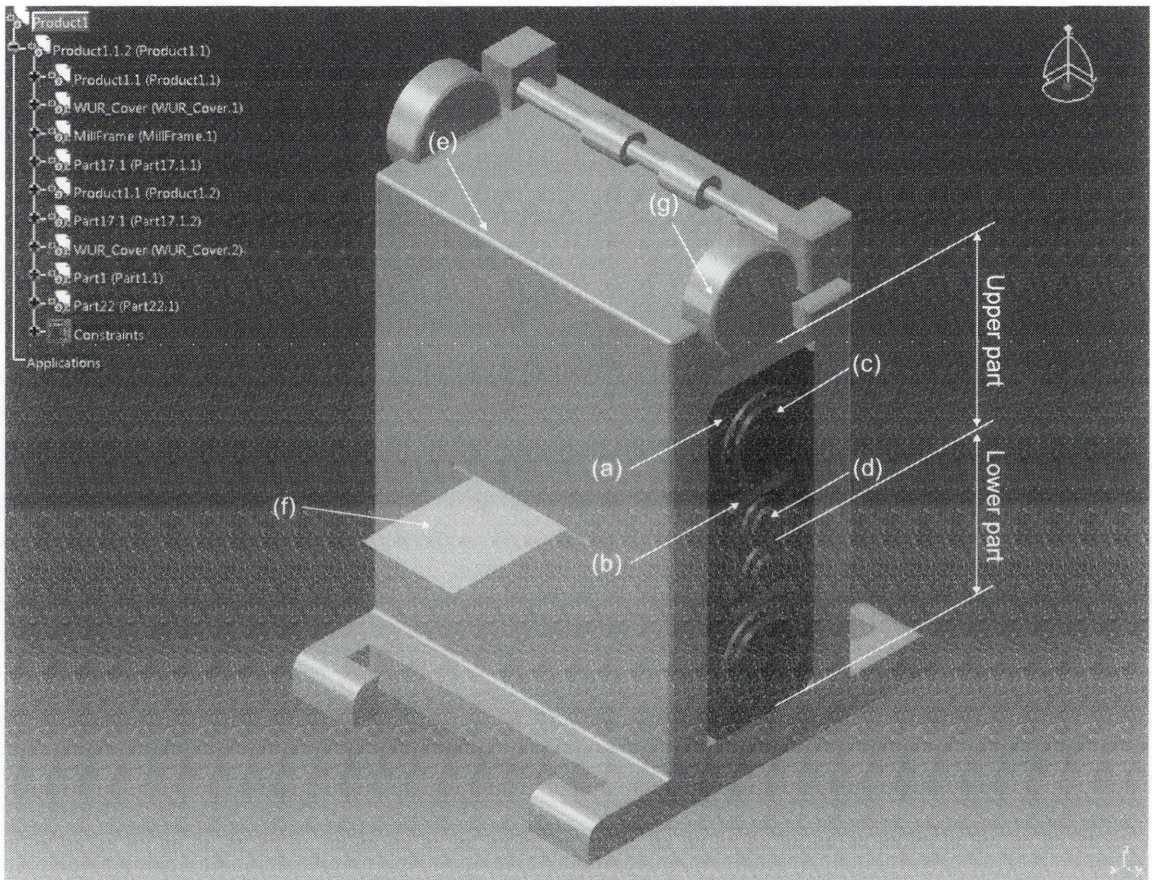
Assembly of a rolling stand in cold rolling mill: (a) backup roll bearing housing chock, (b) work roll bearing housing chock, (c) backup roll, (d) work roll, (e) mill Stand, (f) strip and (g) hydraulic cylinder
